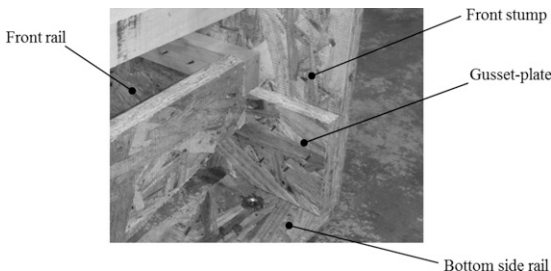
A typical L-shaped, one-sided, single-gusset-plate joint commonly seen in connection of front stump to front rail in a sofa frame construction.
